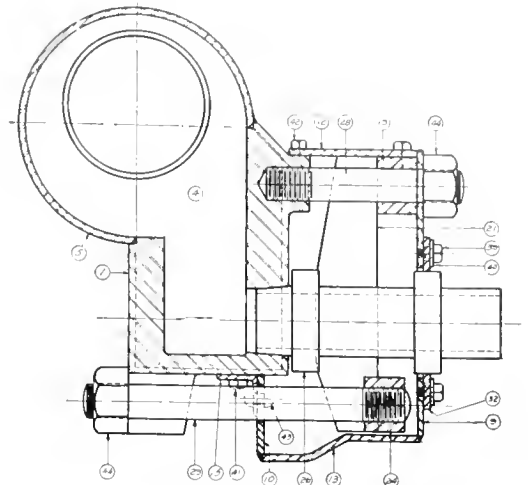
Sectional View of Upper Main Header, Mercury Boiler
